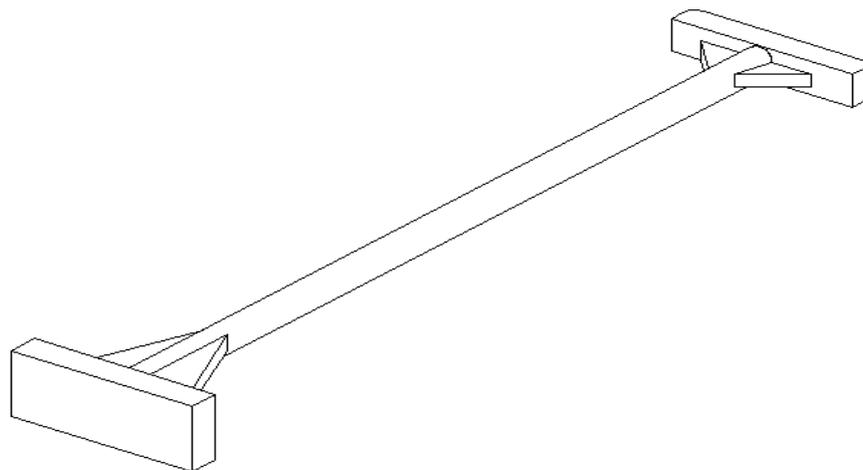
is an enlarged schematic view of the middle sleeve tie rod
